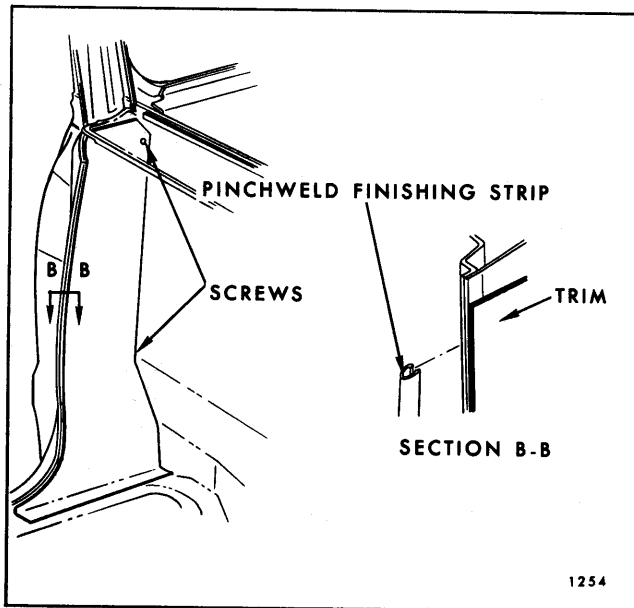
Rear Quarter Trim Assembly - "A-80" Styles
